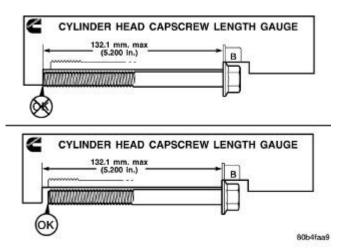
Head Bolt Stretch Gauge Courtesy of CHRYSLER GROUP, LLC
